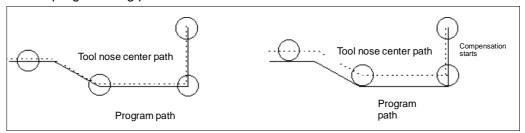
Tool Path if Programming via Tool Nose Center
